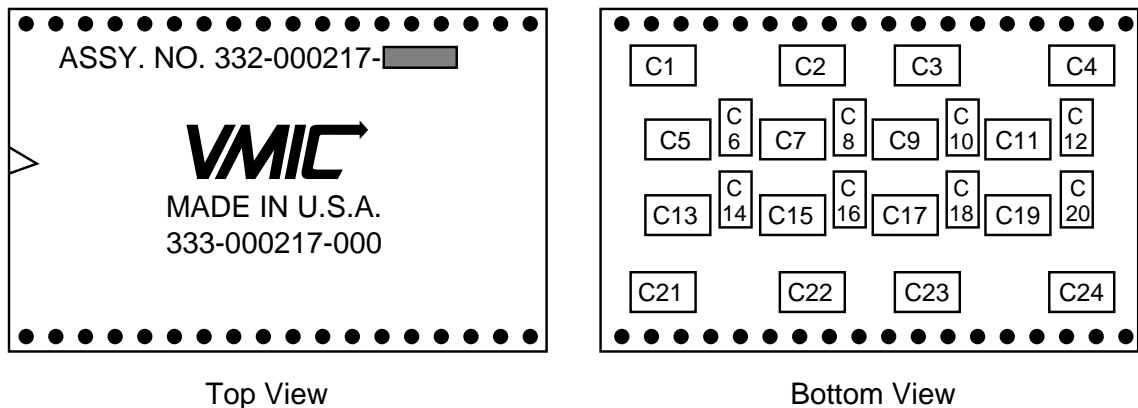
Assembly Drawing of the 0217 Filter Board
